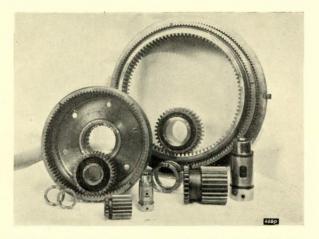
Turbo-generator gearing in s.s. Neleus: first and second train components of double reduction gear
